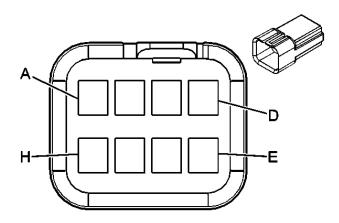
Outside Rearview Mirror - Driver C1 Connector End View
